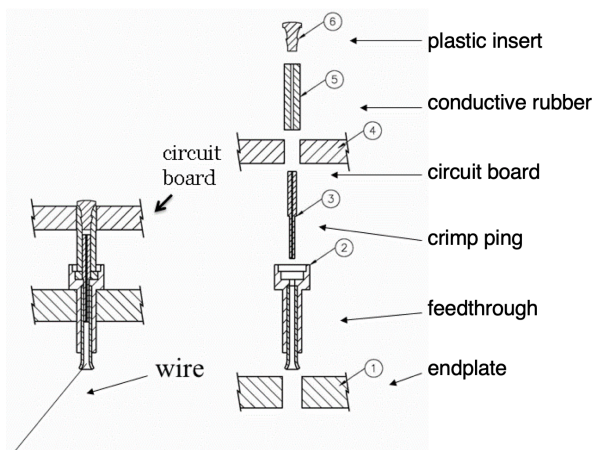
The collection of all parts used to physically attach a wire end to a chamber endplate and to provide an electrical connection to a chamber-mounted circuit board.
